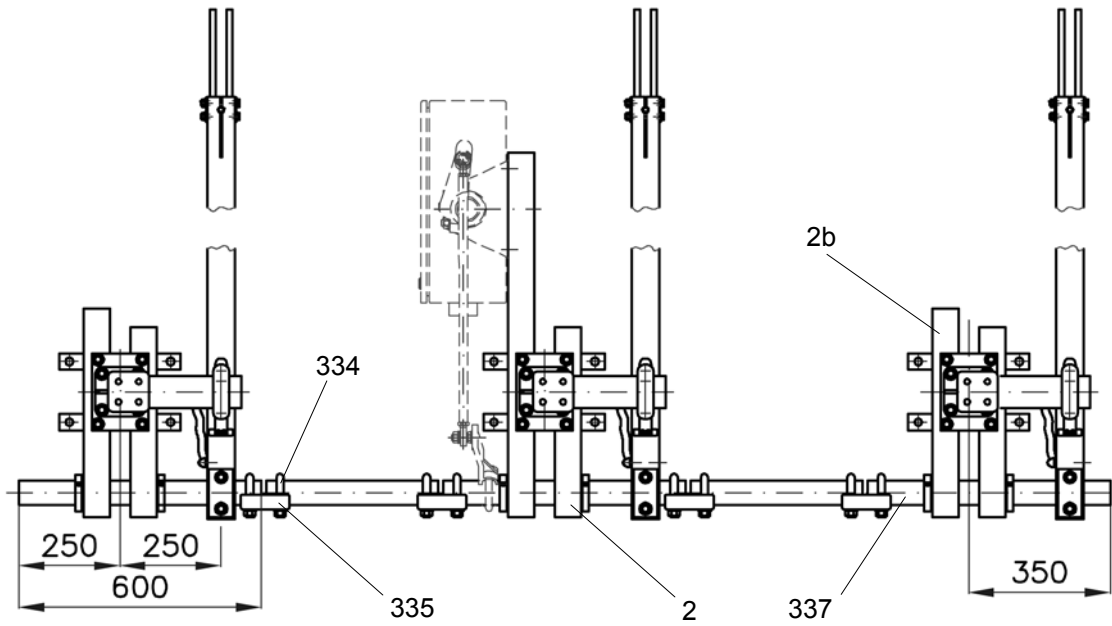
Mounting of earthing switch in parallel arrangement if earthing switch is delivered as complete poles
